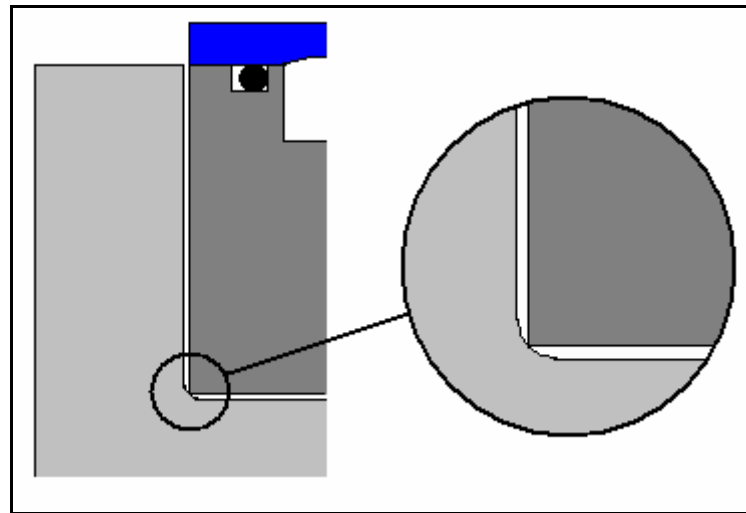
The problem encountered with using an integral thrust/journal bearing surface.
